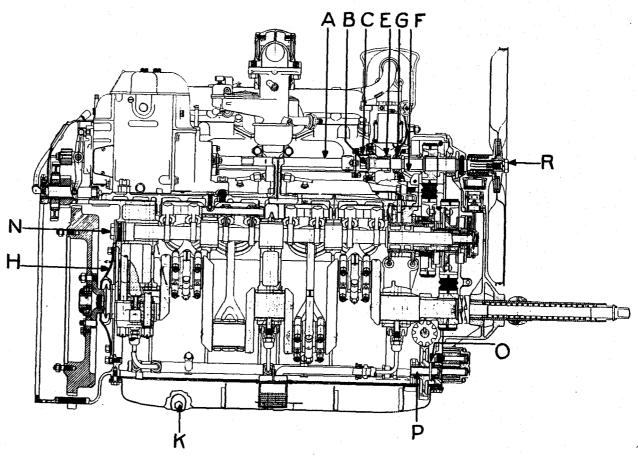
Sectional View (Longitudinal) of Type 61 Engine
